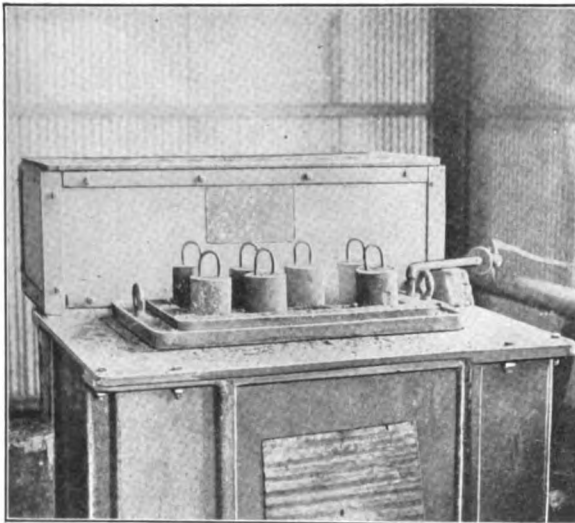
DRAWING FURNACE AND LEAD BATH APPLIED PRIOR TO FINISHING CUTS
